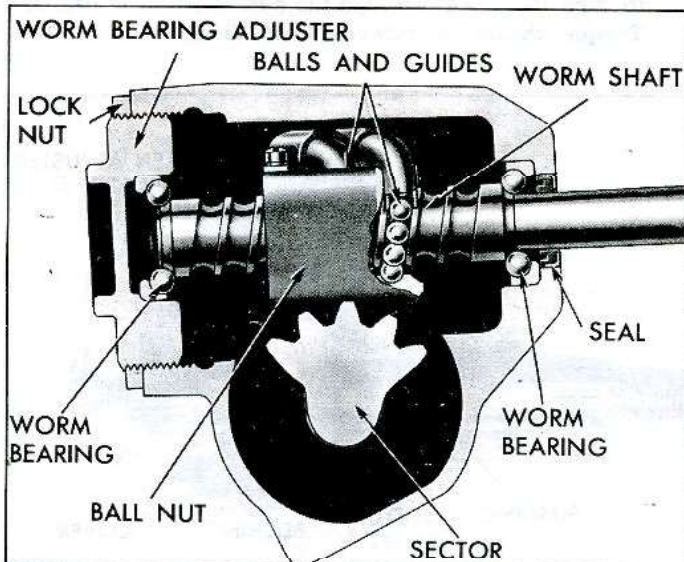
Steering Gear Worm and Ball Nut Circuits
